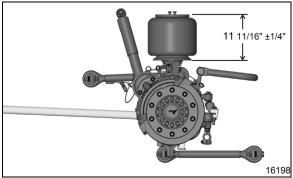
FRONT I-BEAM AXLE AIR SPRING CLEARANCE
